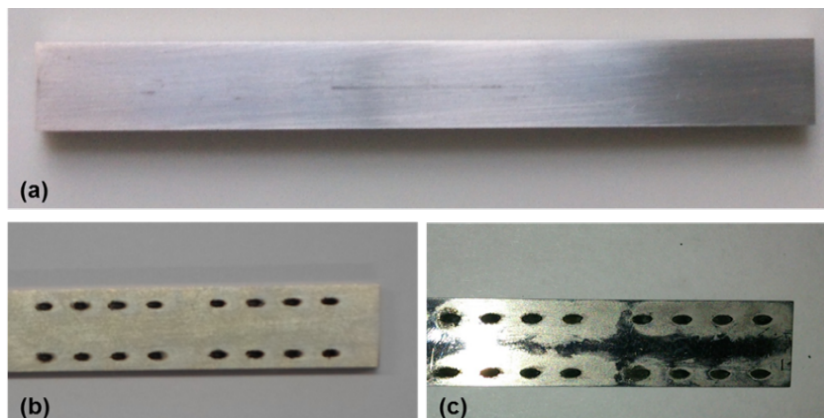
Example of a section of CMSX-4 sample (a) before laser drilling; after laser drilling: (b) with anti-spatter coating and (c) with anti-spatter coating removed.
